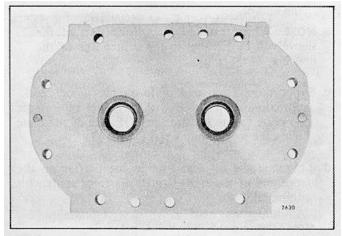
Location of Oil Seal Ring Collars in End Plate
